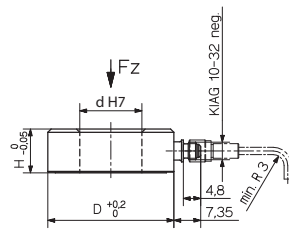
Dimensions Load washers Types 9104A ... 9107A
